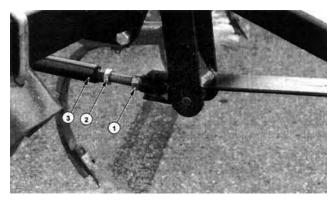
Depth Link Adjustor Assembly. (1) Adjusting Nut, (2) Jam Nut and (3) Depth Link Adjustor Rod.
